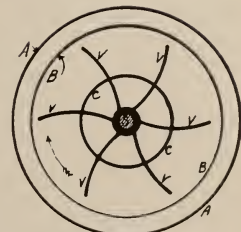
Moore Rotary Screen of Jenckes Machine Co.
